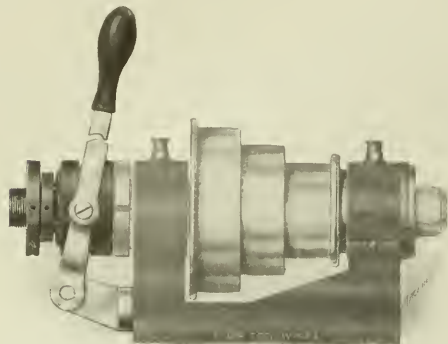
Automatic Chuck Closer for Bench Lathes made by Elgin Tool Works
